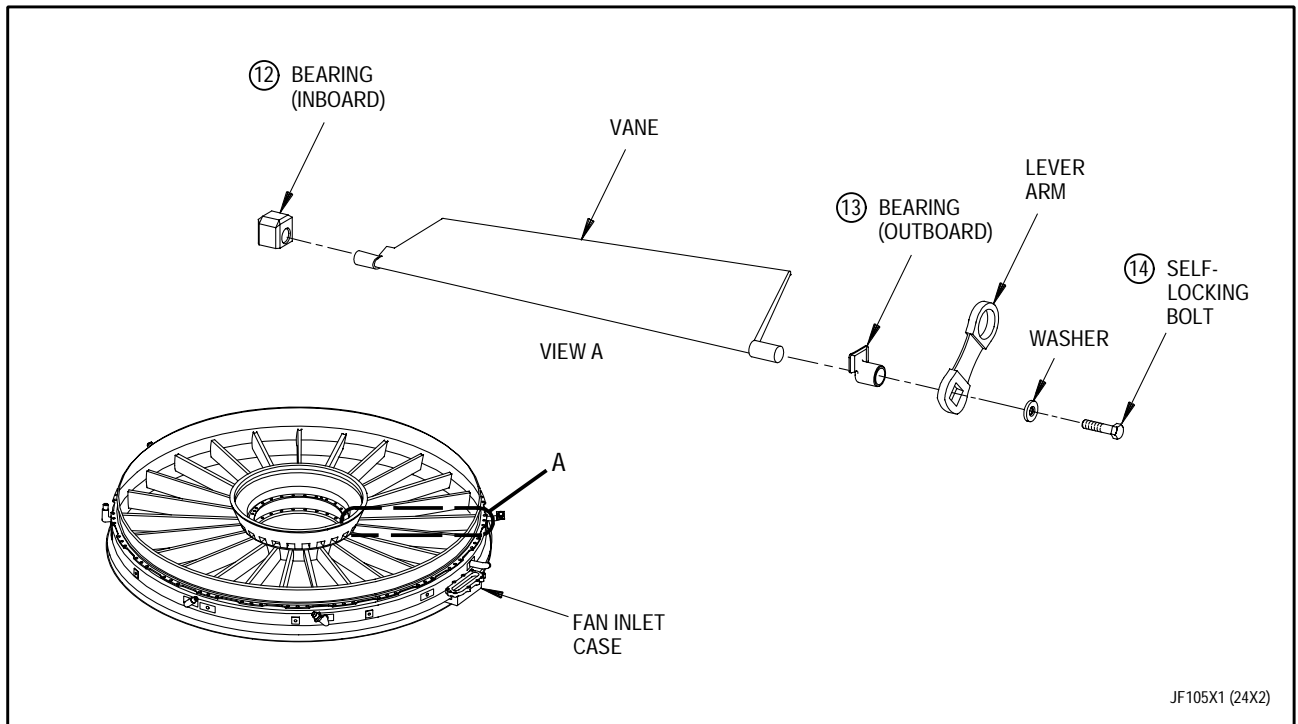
Front Compressor Stator Variable Inlet Vane, Inlet and Shroud Bearings, and Inlet Self-Locking Bolts - Inspection (Sheet 1 of 2)
